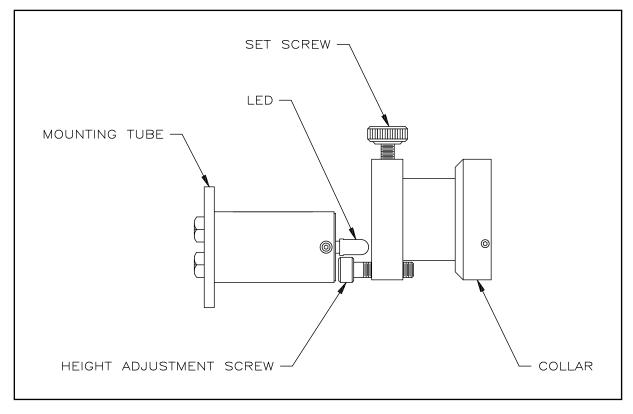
IS-730 HEIGHT ADJUSTMENT
